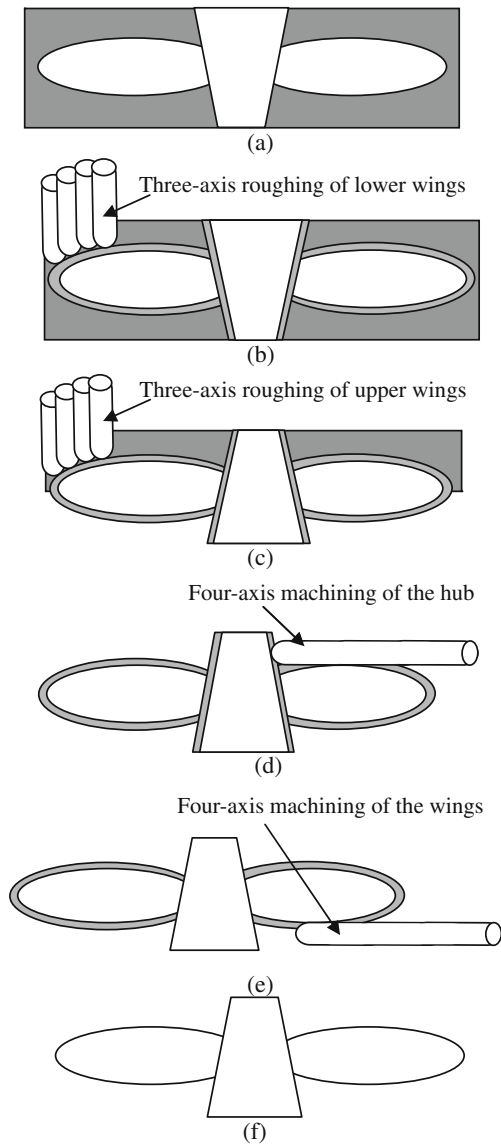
The procedure for the machining of a model propeller: a setup, b rough cut by three-axis machining, c turnover and rough cut of the other side, d the four-axis machining of the hub, e the four-axis machining of the wing surfaces, f the completed model propeller
